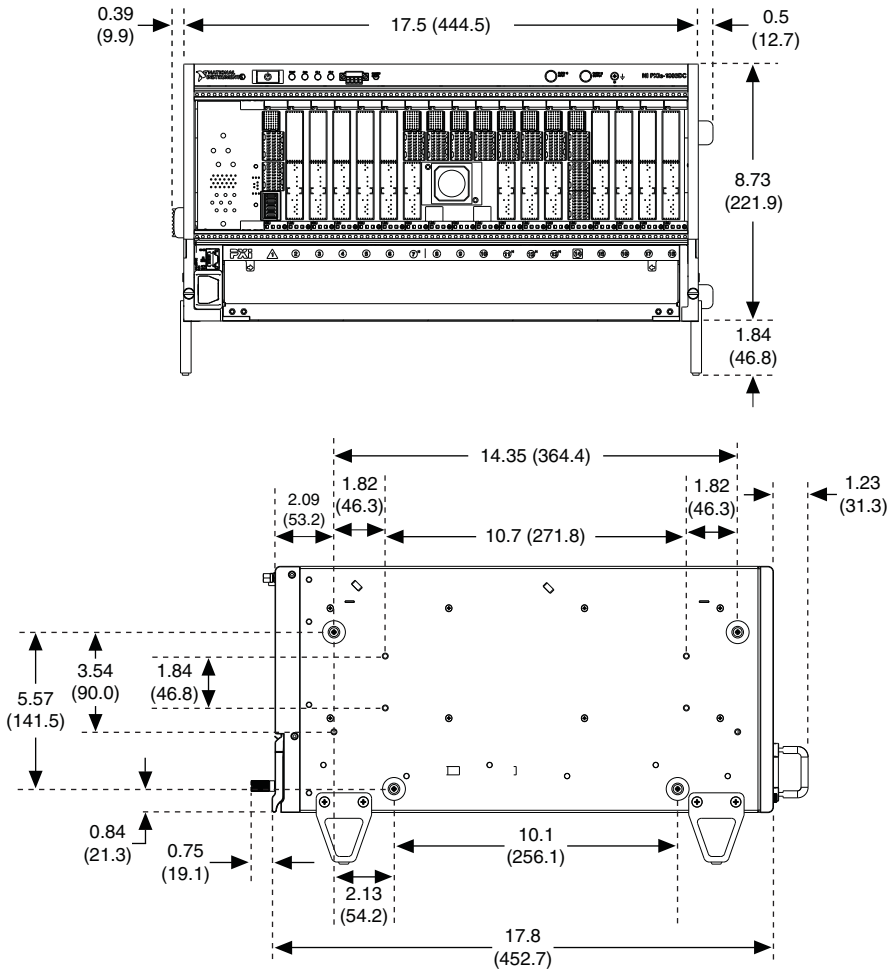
PXle-1066DC Chassis Dimensions (Bottom)
